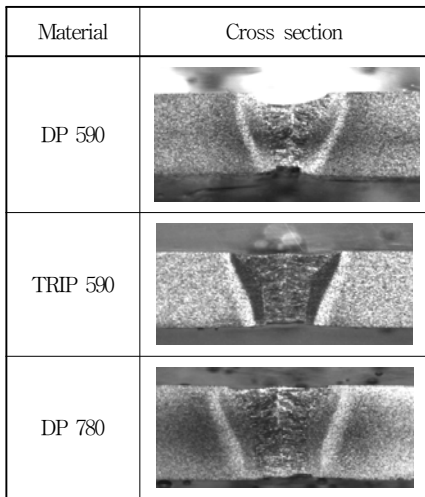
Cross section of butt welds of 600~800MPa level steels
